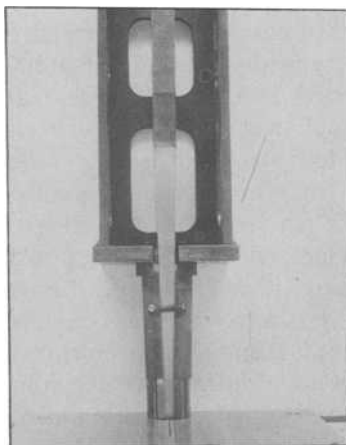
Assembly photo of support system used to prevent lifting of the split pins on wedge withdrawal.
